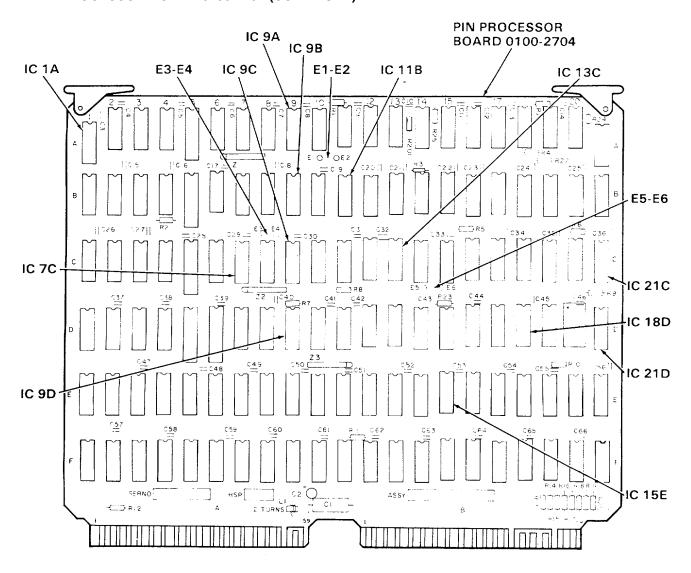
Cable Connection Points and Components Used During Pin Processor Board Test (Sheet 1 of 2)
